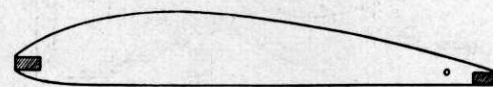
Showing Arrangement of Spars and the Wing Section. Note hole for thread binding of spar to rib.
